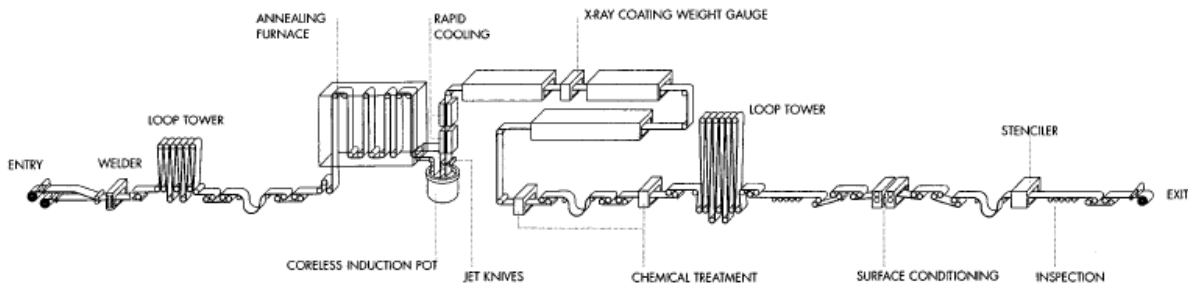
Schematic of the typical manufacturing process of aluminized steel Type 2 (source: www.aksteel.com).
